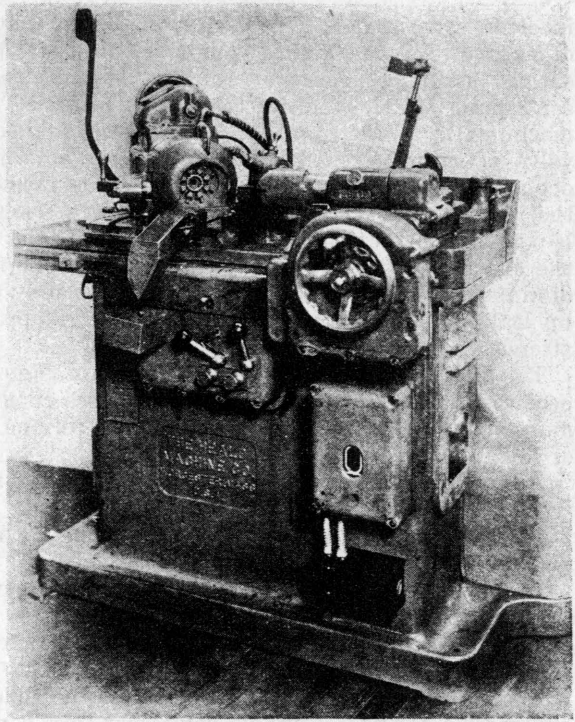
Heald Sizematic grinder used by a large manufacturer for the economical high production manufacture of inserts. This set-up produces 450 pieces per hour from a battery of three machines
